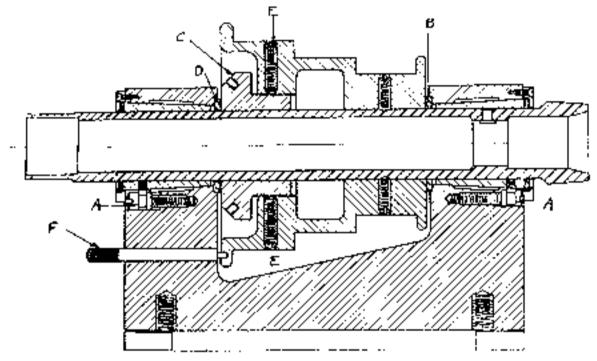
Sectional Drawing of Plain Bearing Headstock
